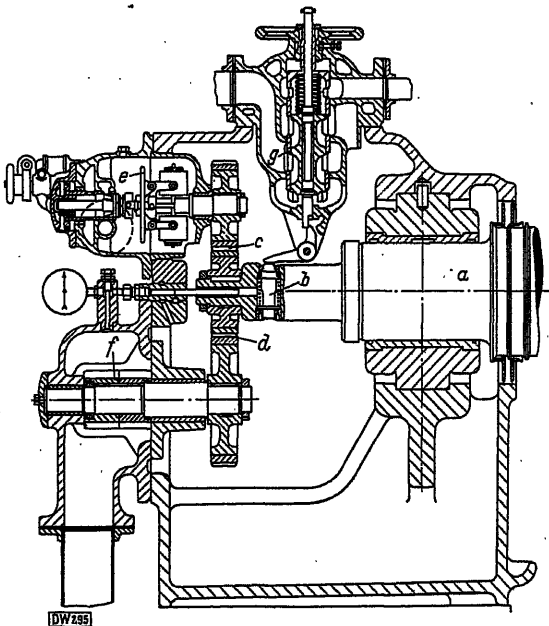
B.B.C.*, section through the governor, the operating gear of the stop valve and the emergency tripping gear
